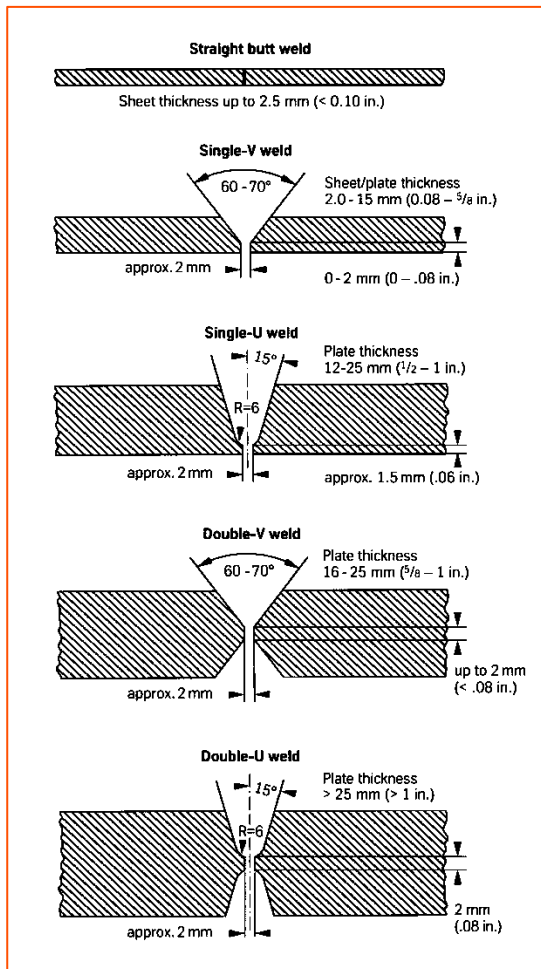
Seam preparation for welding nickel alloys and special stainless steels
